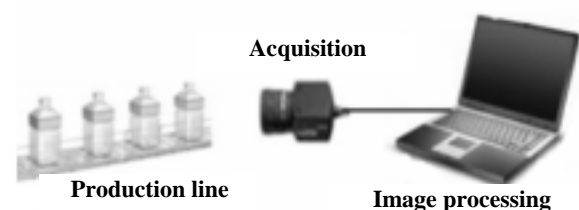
The simplest arrangement of the machine vision measuring olive oil bottles on production lines [18]
